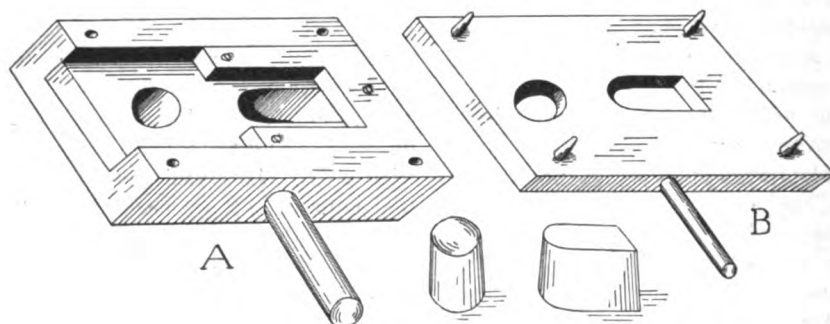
TOOLS FOR PUNCHING THE ROUND AND OBLONG HOLES IN THE SPRING.
